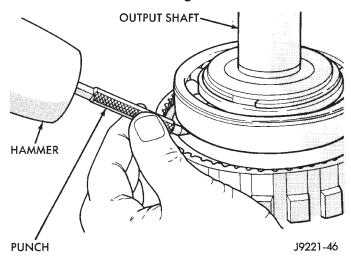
Marking Annulus Gear And Output Shaft For Assembly Alignment
